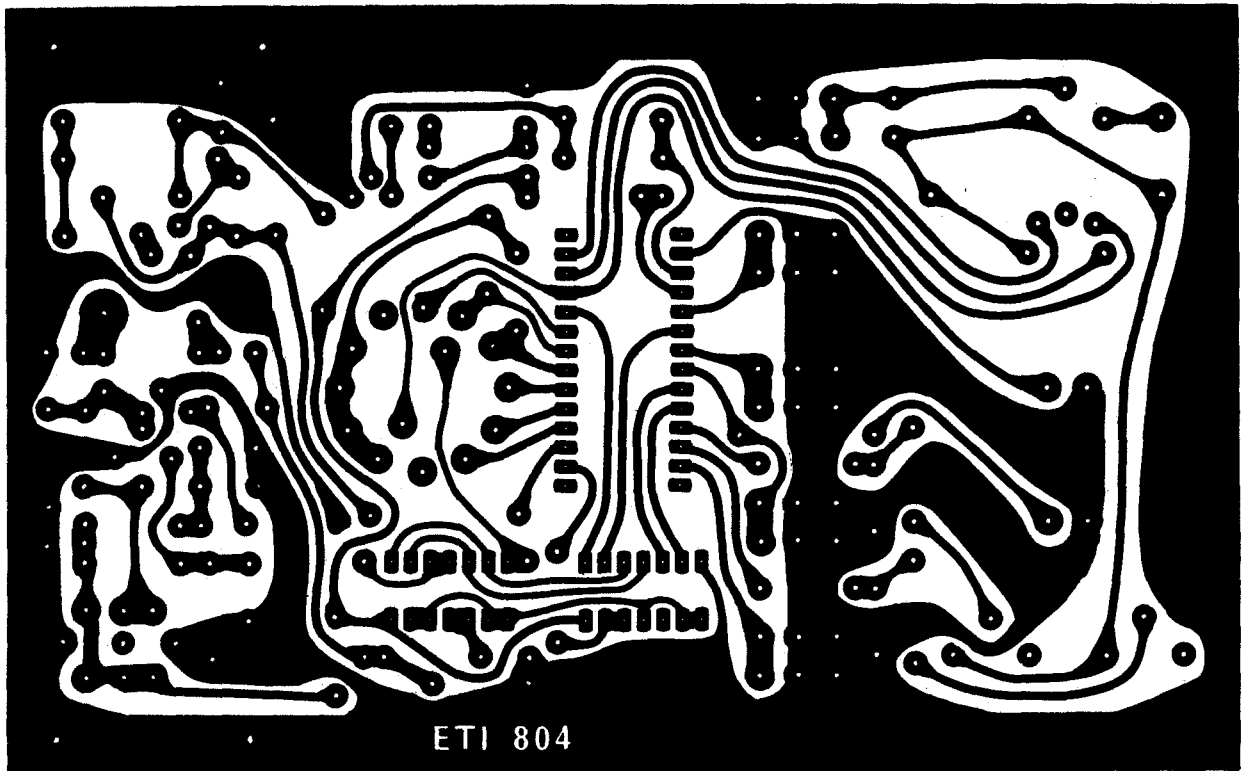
Printed-circuit layout. Full size 163mm x 102mm.
